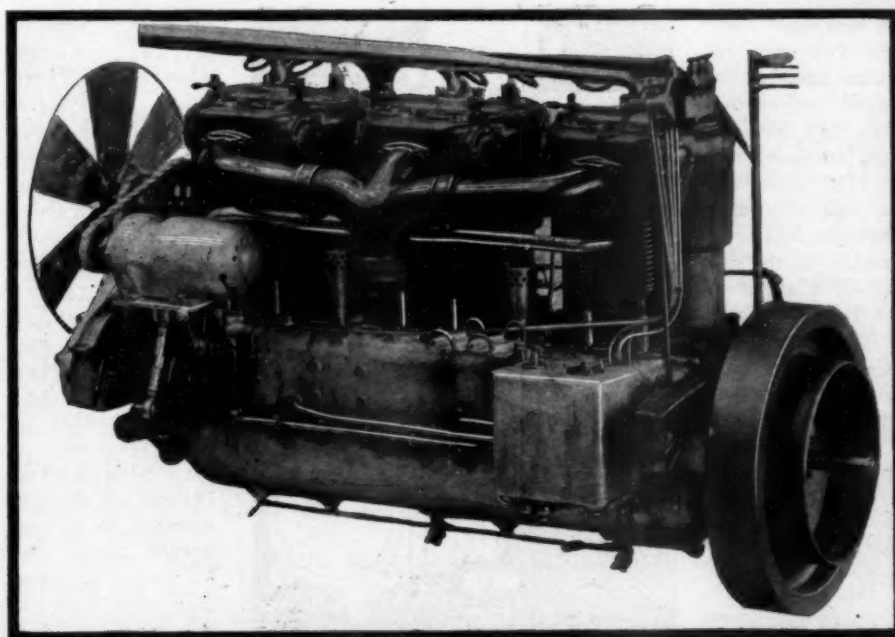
Exhaust side of 48 Six motor showing new mounting of light dynamo T-shaped exhaust manifold and oil-can brackets
